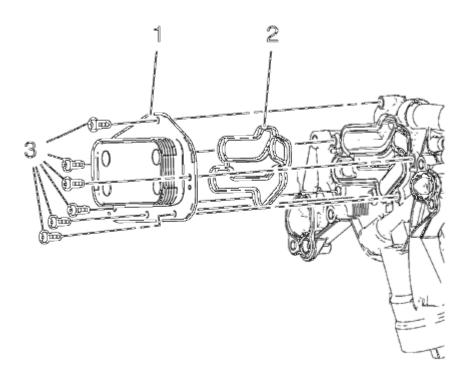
Engine Oil Cooler Courtesy of GENERAL MOTORS COMPANY
